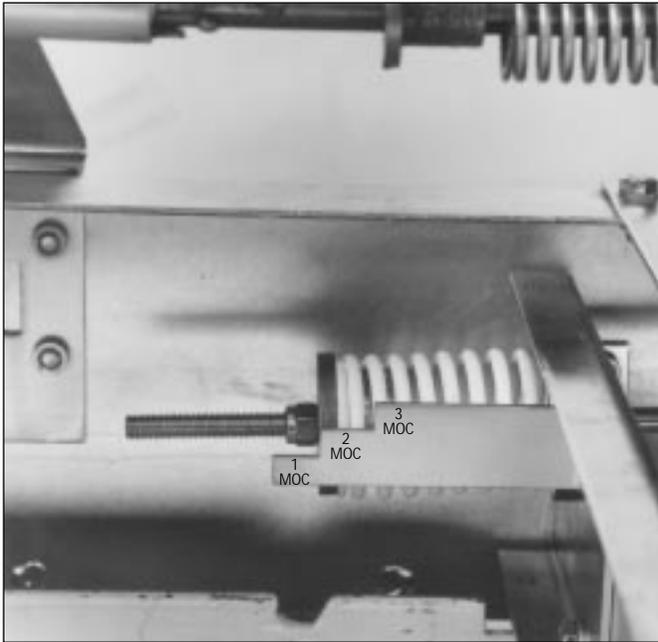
Drive Spring Shown Adjusted for 2 MOC Switches
